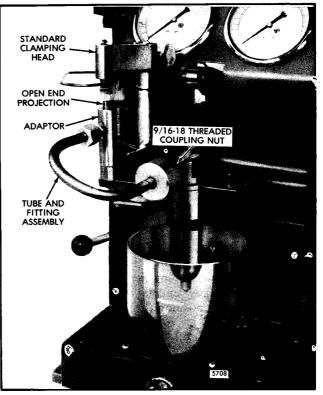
Adaptor and Tube Assembly on Injector Tester J 23010
